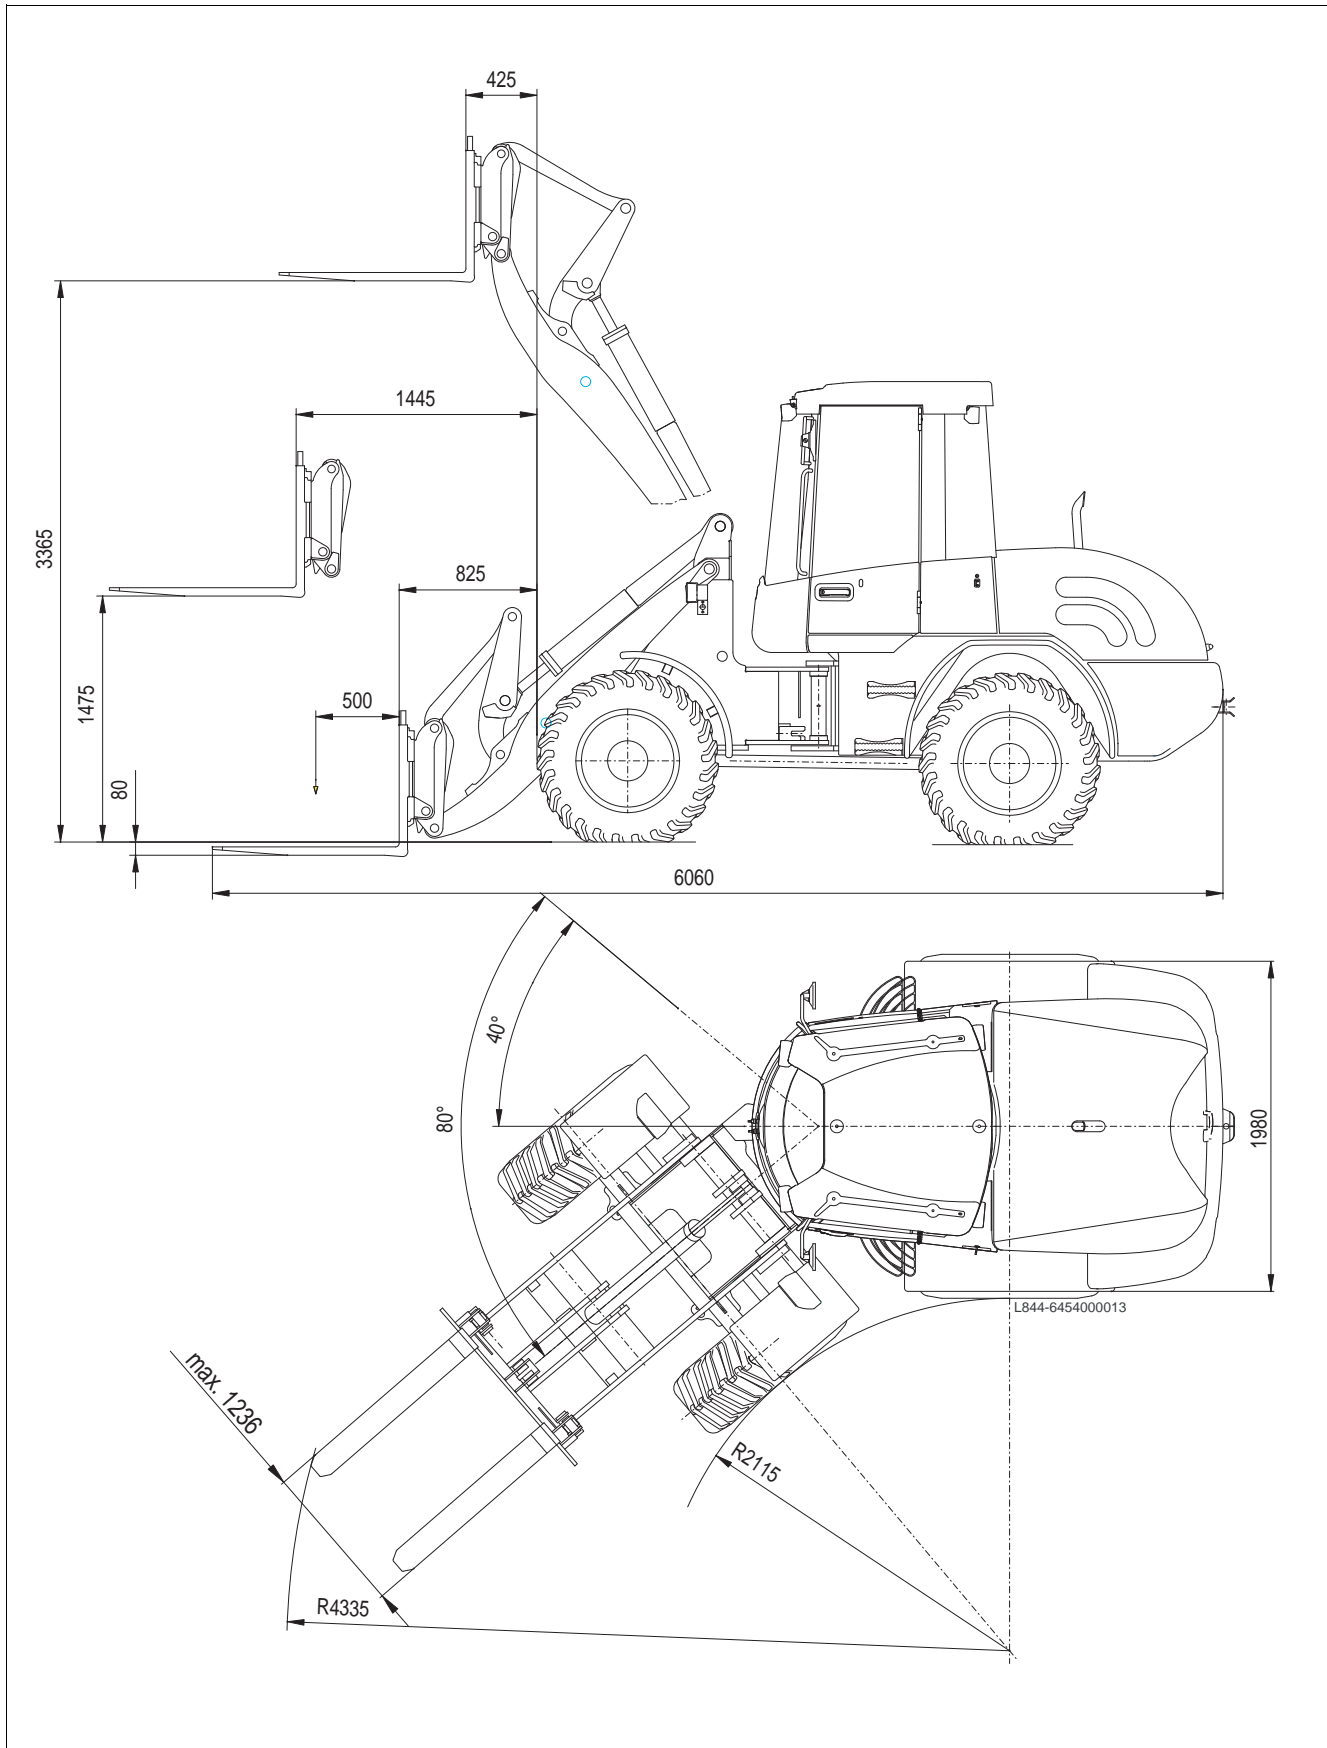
Dimensioned drawing with fork lift attachment and 405/70 R 20 tires
